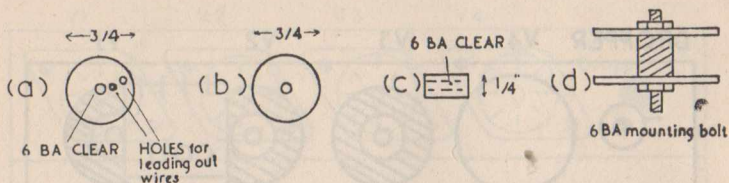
Method of making H.F. choke. (a) and (b) show two end cheeks made of paxolin or shellacked cardboard. (c) shows wooden centre, and (d) choke assembled, ready for wire to be wound on.
